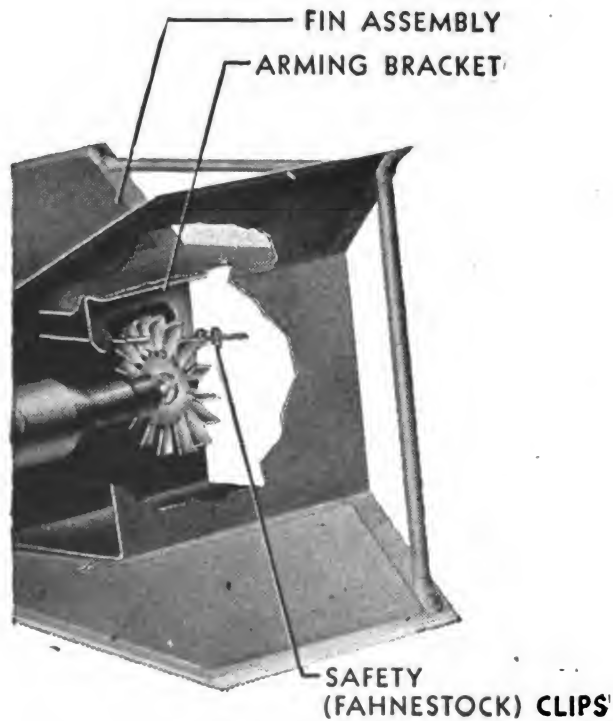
Arming wire bracket inside tail of a Navy bomb.
